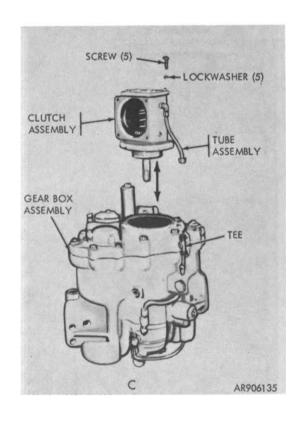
Traversing gearbox disassembly o assembly (2 of 15).
